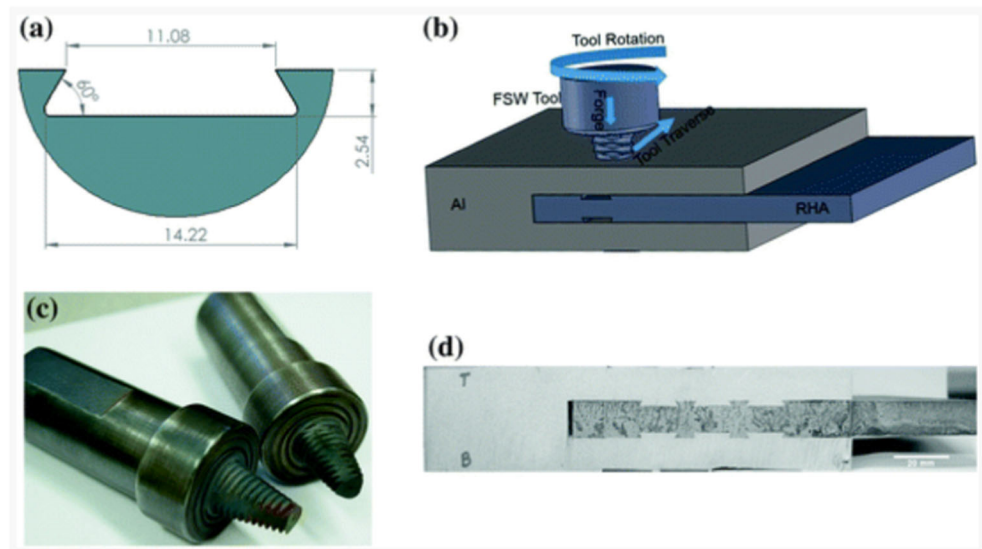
Weld made with slit saw groove and O-ring groove [140]
